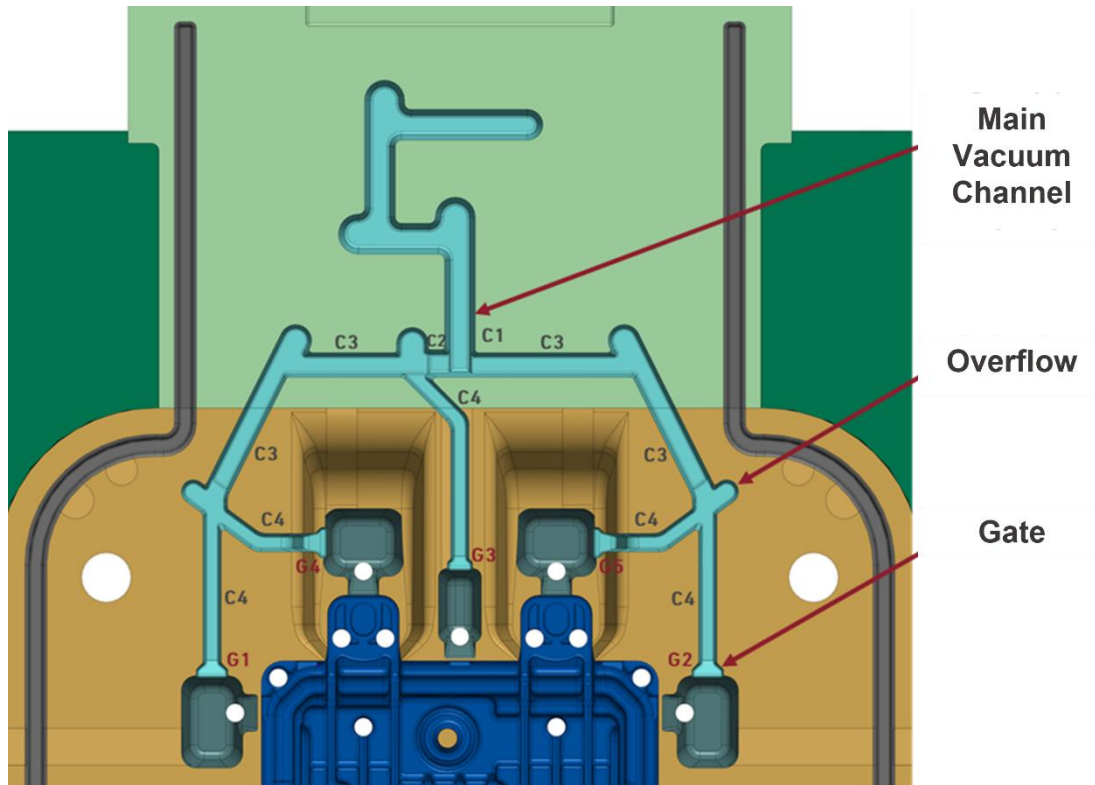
Sizing/Geometry of the vacuum channels of the prototype mold.
